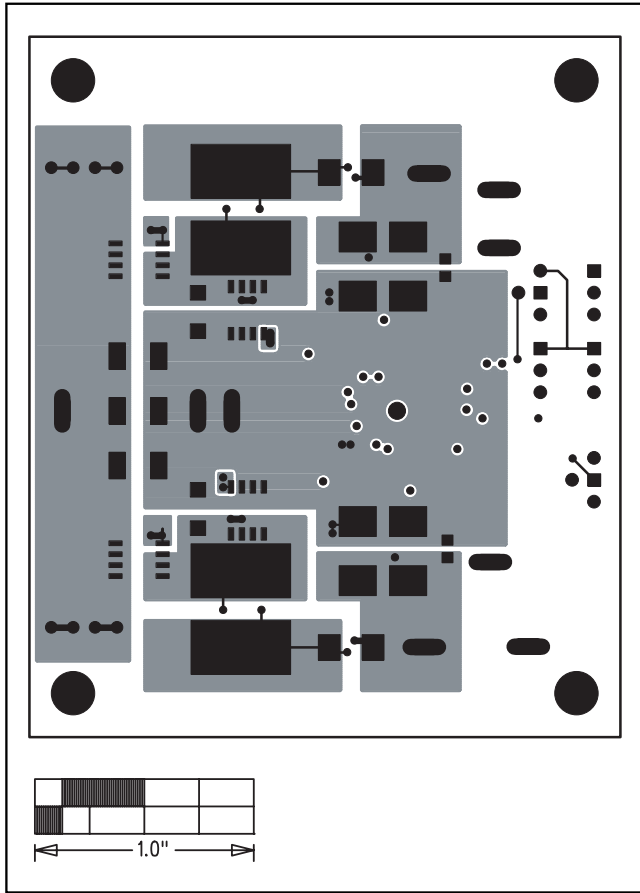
MAX1540 EV Kit PC Board Layout—Component Side
